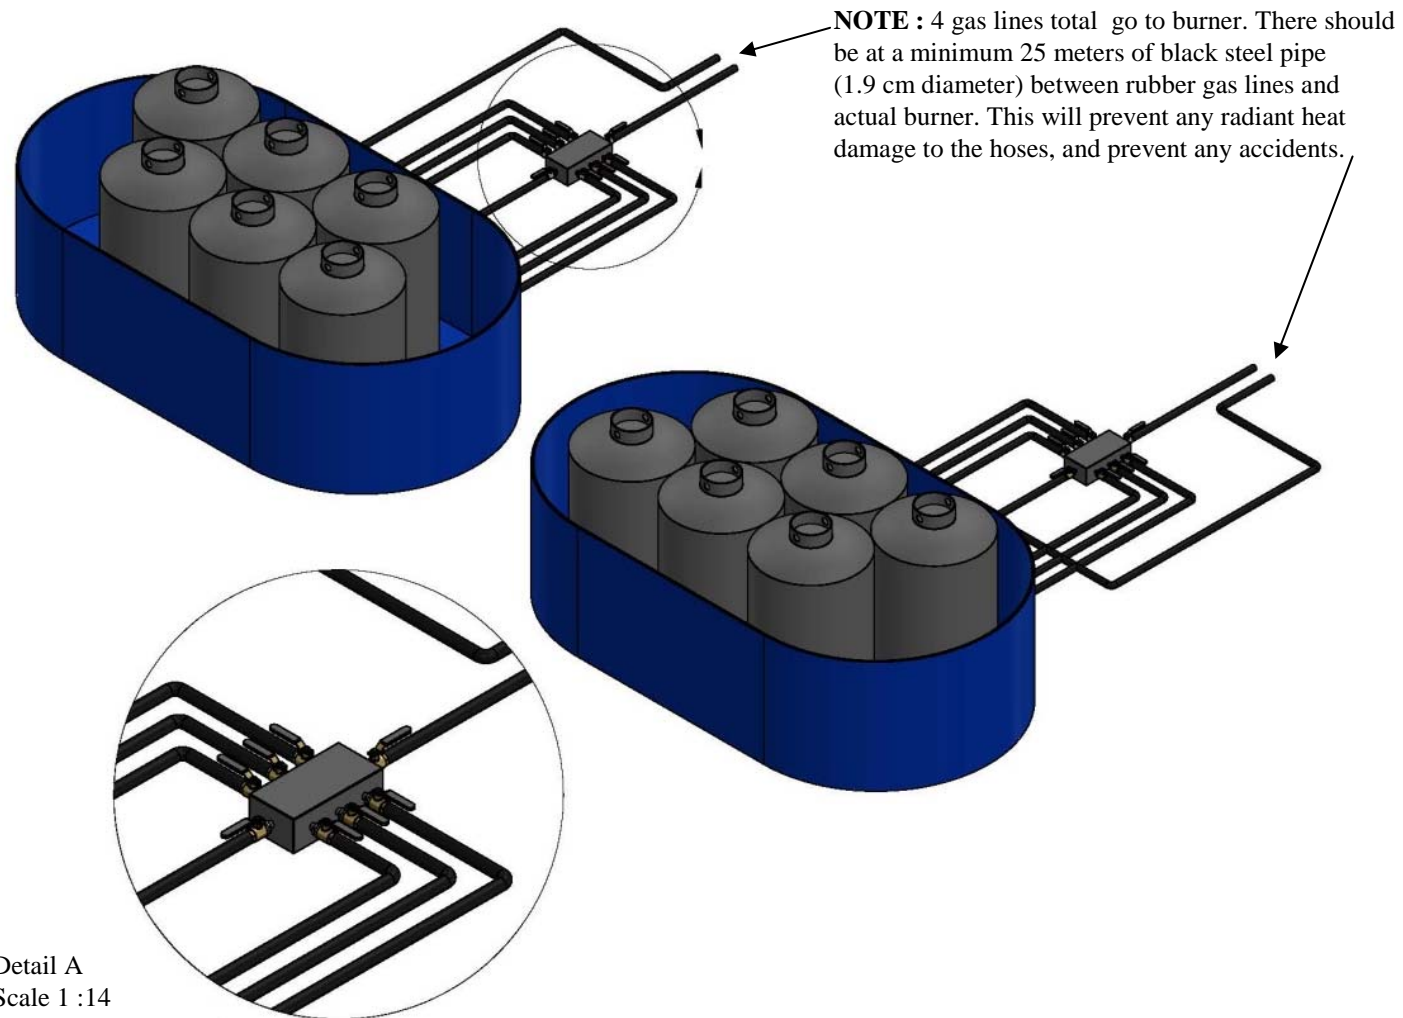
Proposed USA gas-fueled Test 6c burner assembly
